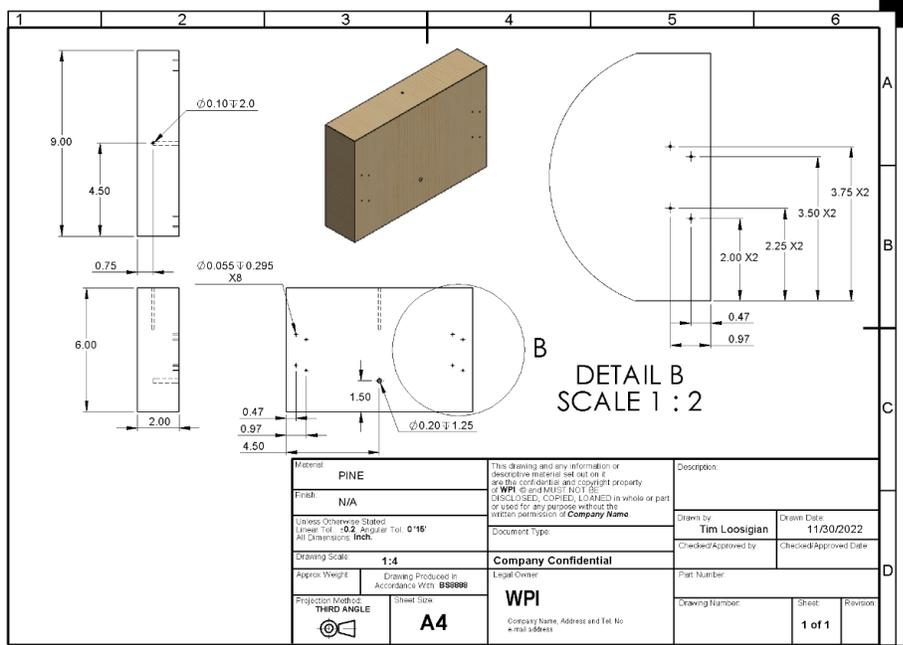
Technical drawing of 9-in. long 2-in. x 6-in. square surrounding wall with pre-drilled holes
